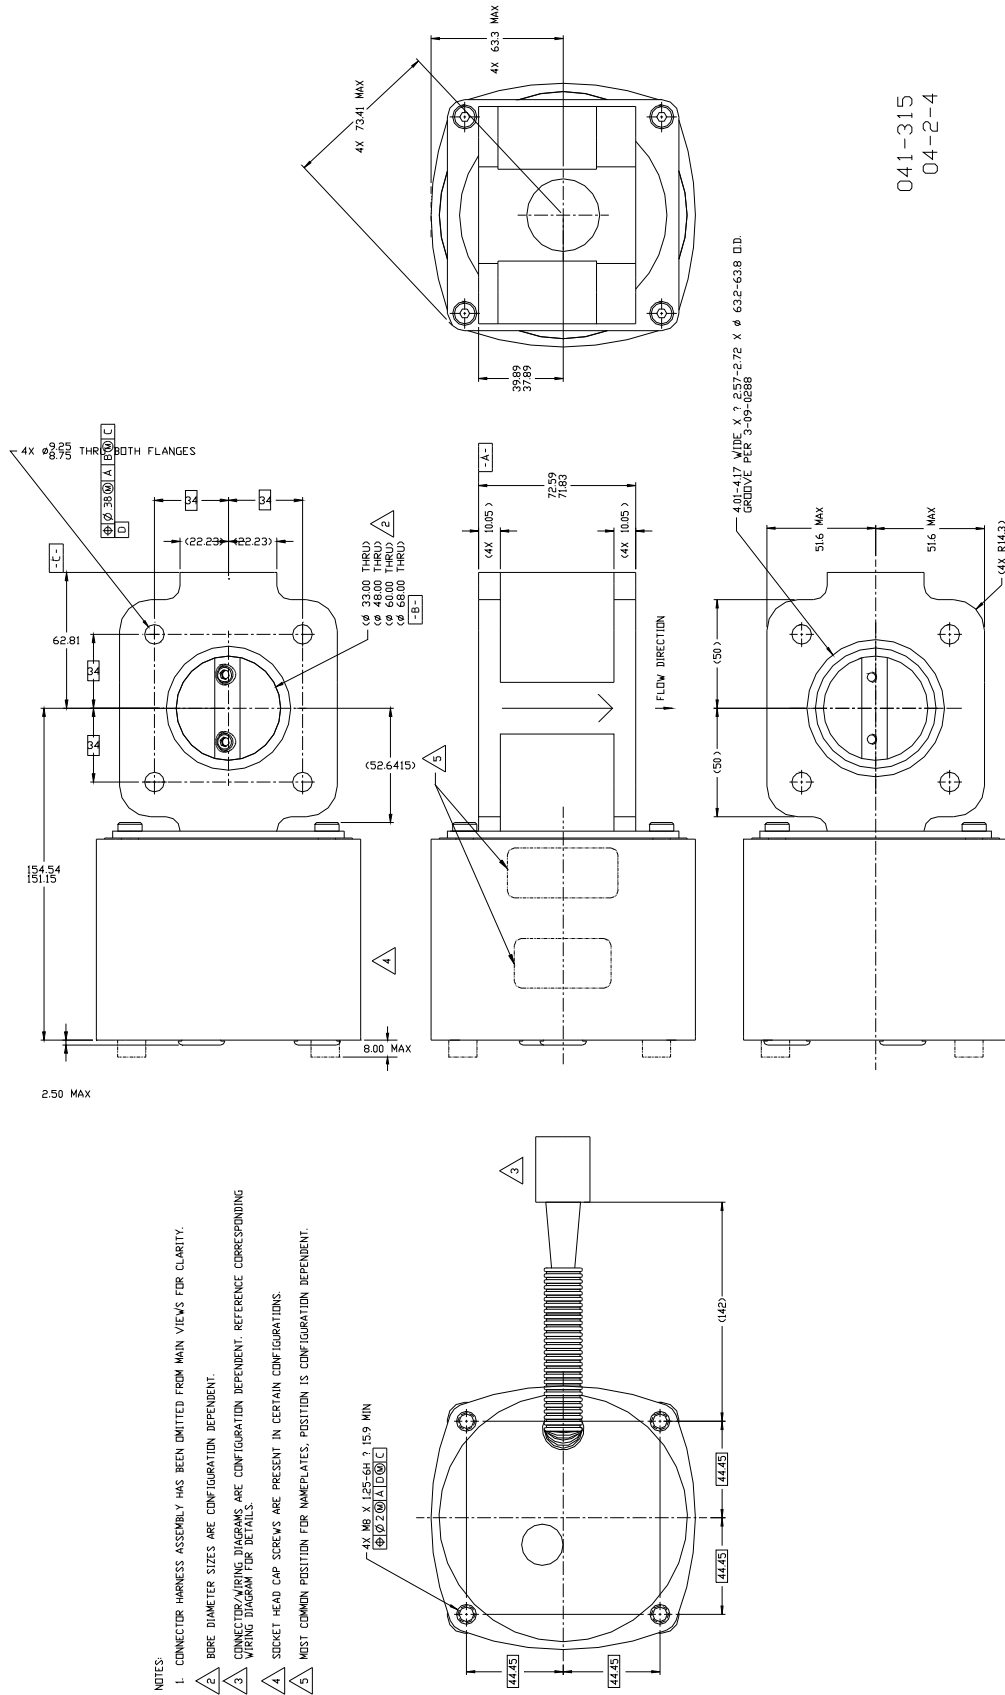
Flo-Tech Outline Drawing (Thick Flange Mounting)
